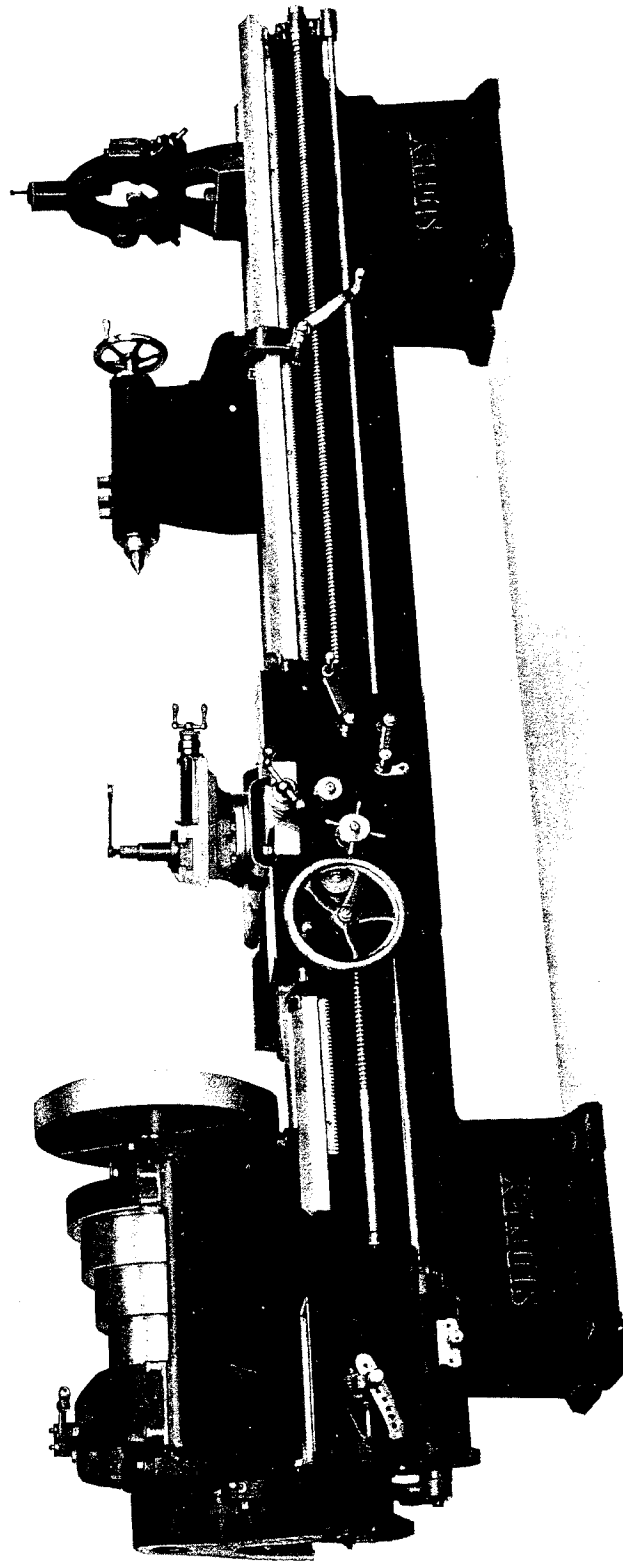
27" x 14' Sidney Heavy Pattern Quick Change Gear Engine Lathe.
